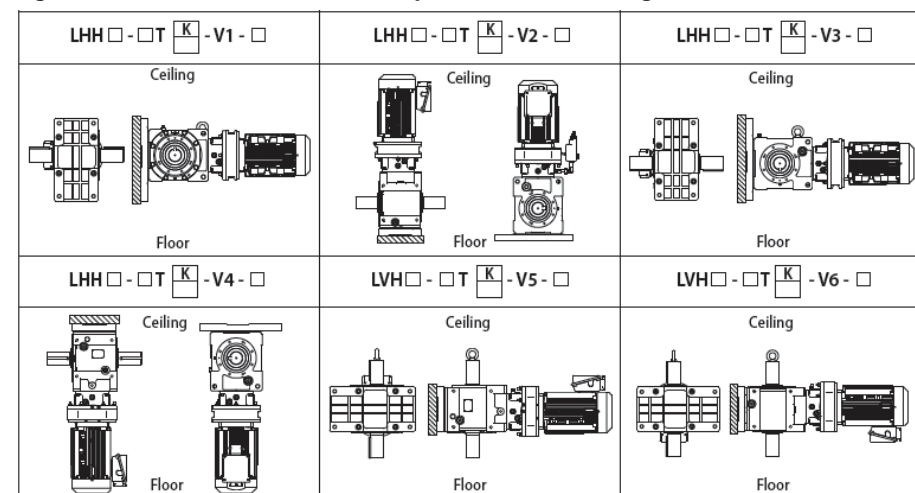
Double Extended Solid Output Shaft (T) - Mounting Foot Side
